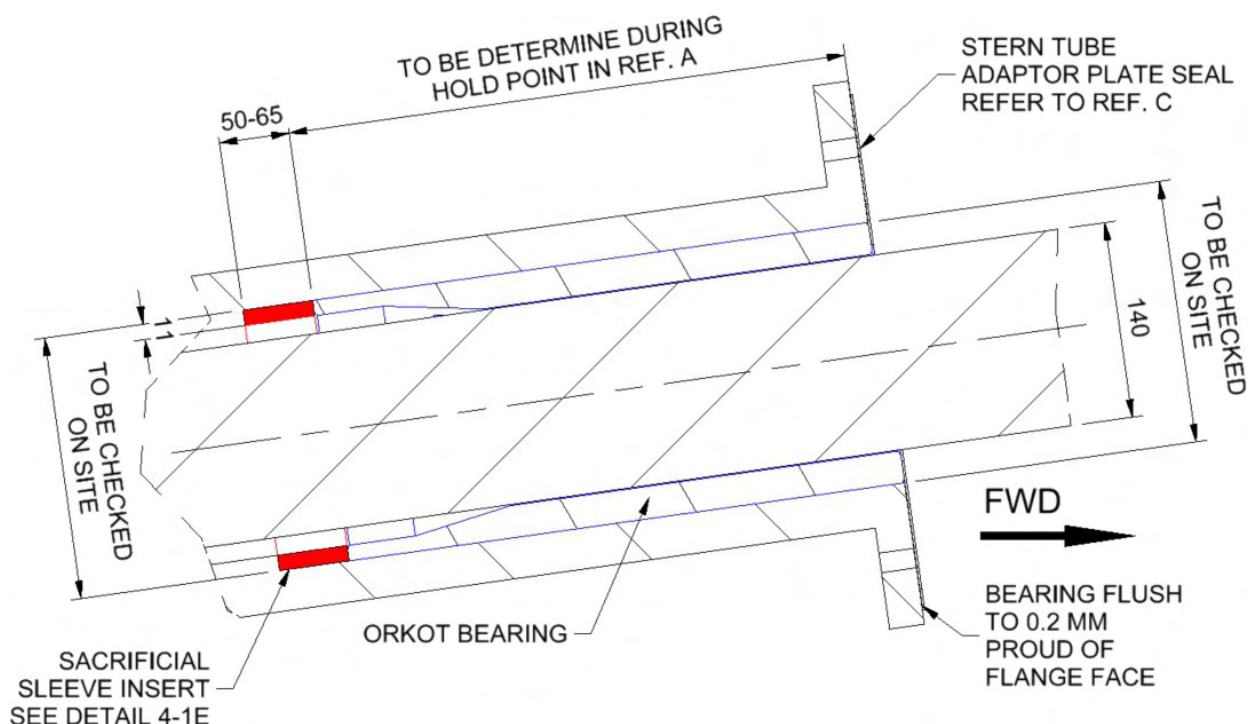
Fwd bearing configuration with aluminium sleeve insert shown red
